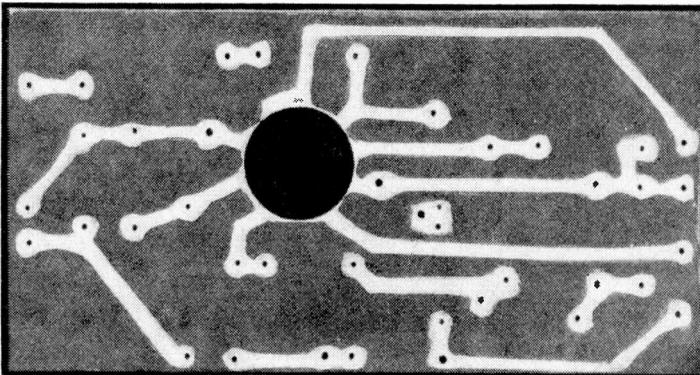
The etched board, drilled and cleaned, and ready for mounting socket and component parts. Mounting holes for the electrolytic capacitors may have to be enlarged somewhat.
